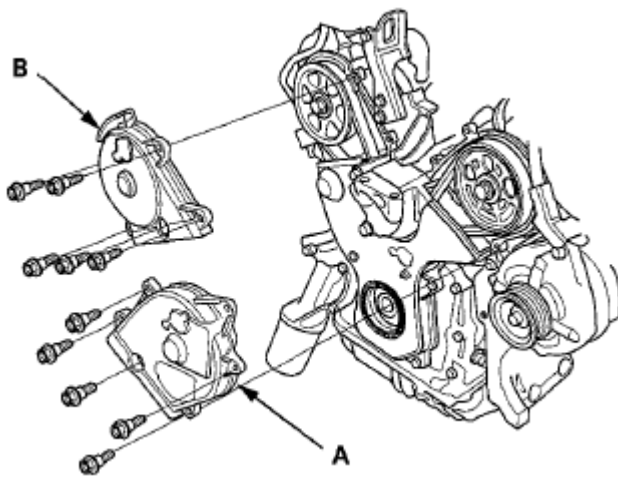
Identifying Front Upper Cover & Rear Upper Cover With Bolts
